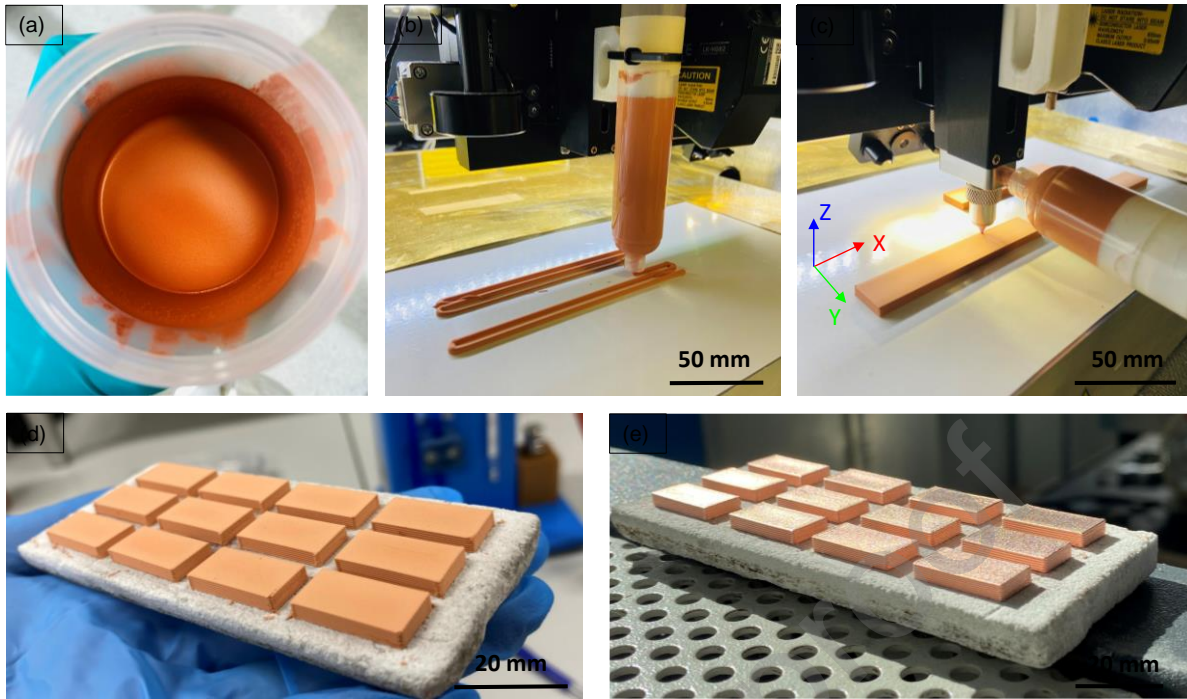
3D micro-extrusion process chain consisting of: (a) the preparation of Cu feedstock paste, (b) controlled extrusion of a single fiber, (c) printing of the parts that are subsequently (d) dried and (e) debound and sintered.
